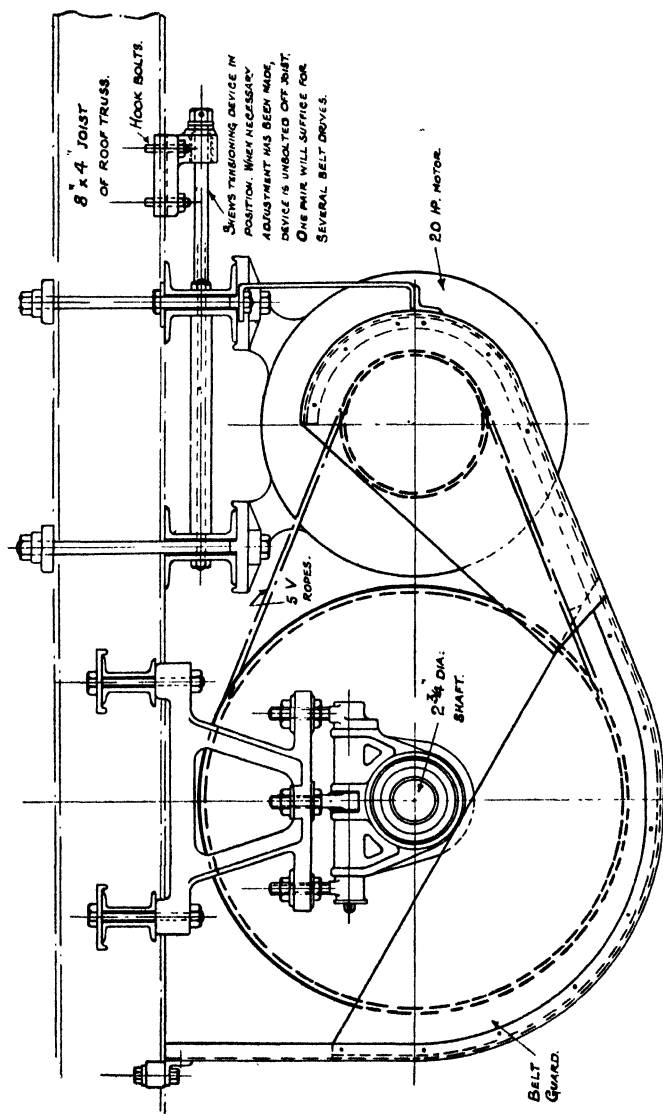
"V" ROPE DRIVE FOR 20 H.P. MOTOR
